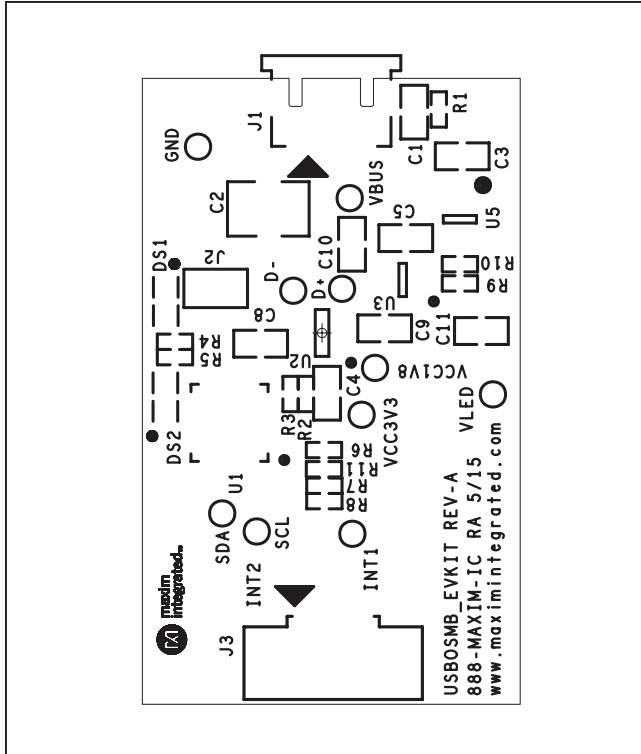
USBOSMB Mother Board Component Placement Guide—Component Side
